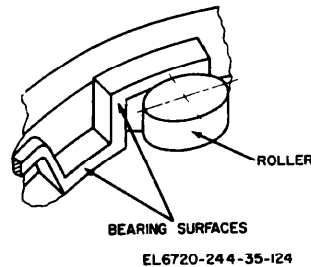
Distance setting gauge 10-meter bearing surfaces.
